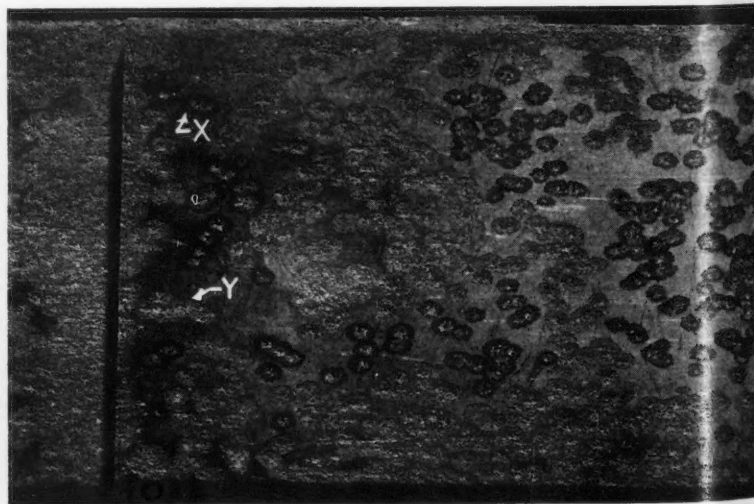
Surface pitting attack observed in annealed series b) spot welds. Arrow at X indicates pits unaltered by the explosion. Pits at Y were oxidized during the explosion. 4X.
